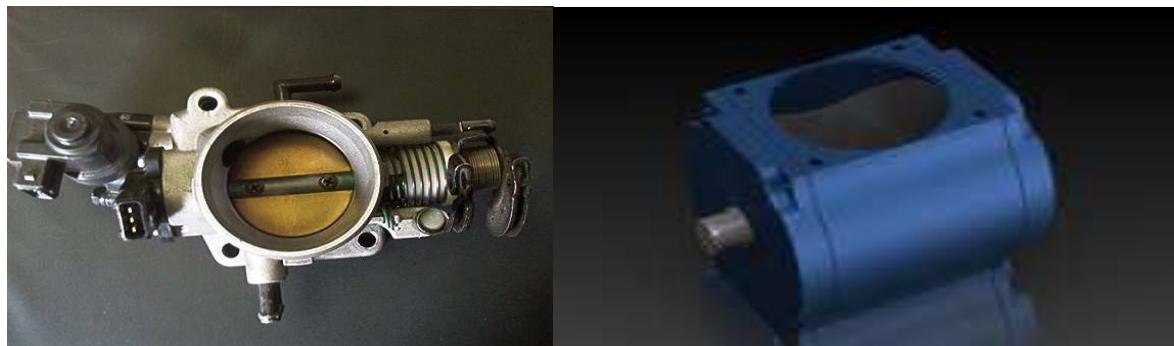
Butterfly Throttle Valve and Barrel Throttle Valve
